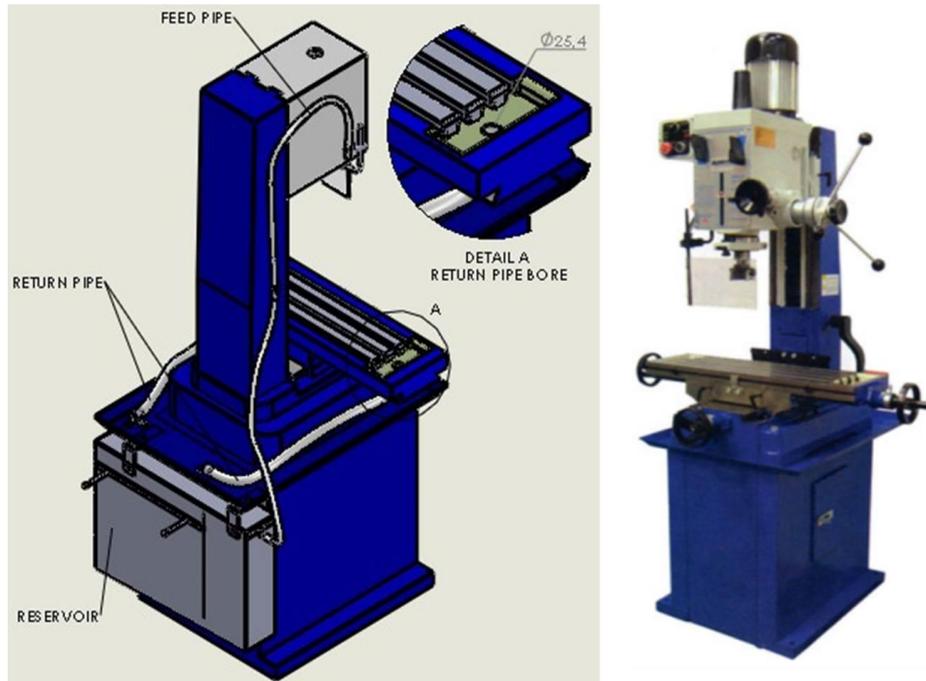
Refrigeration system mounting and Manrod ZX-40/PC MR-205 milling machine 3D model.
